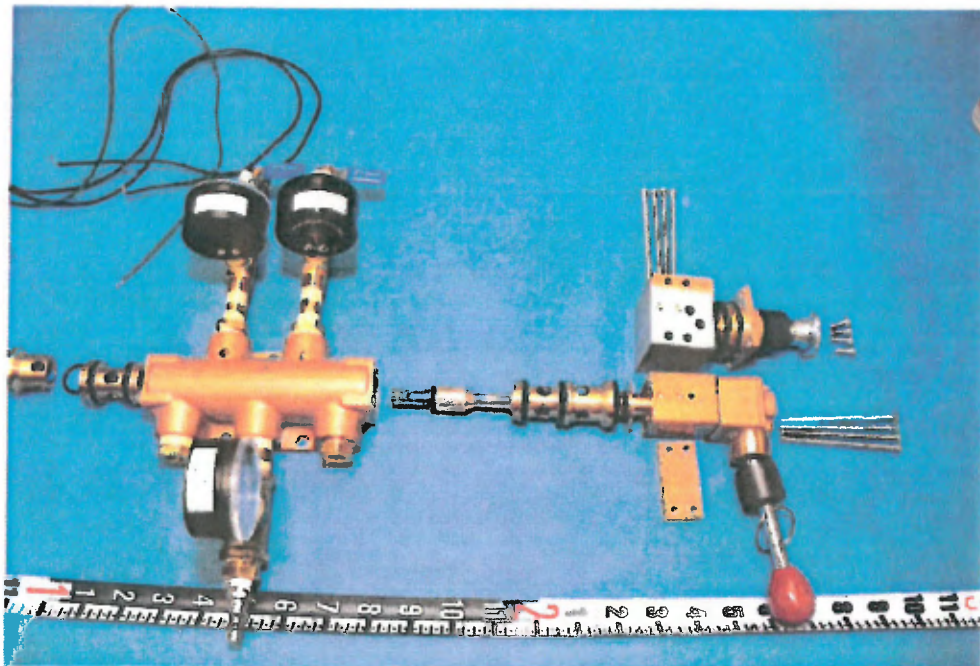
Close View of Exemplar Versa Bottom Dump Valve Components
